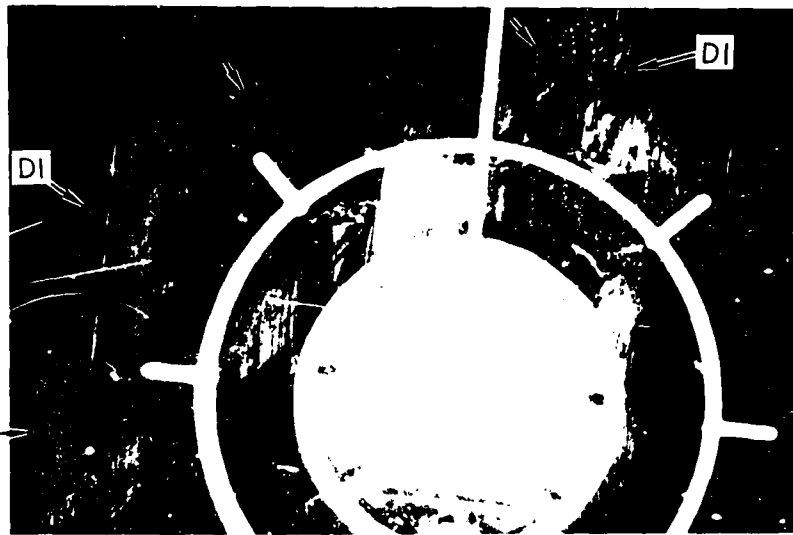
Example of Charting Techniques for Damage on the Lamina of a Strap Segment of a Bolted Joint Specimen
